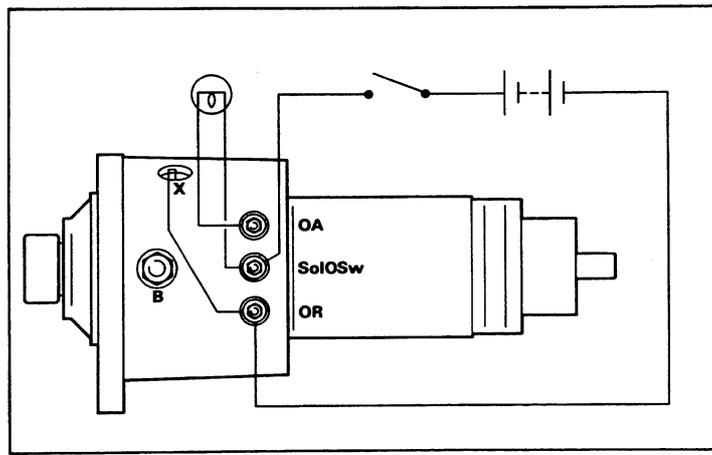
Initial test to check leaf spring adjustment, during partial assembly of starter.
